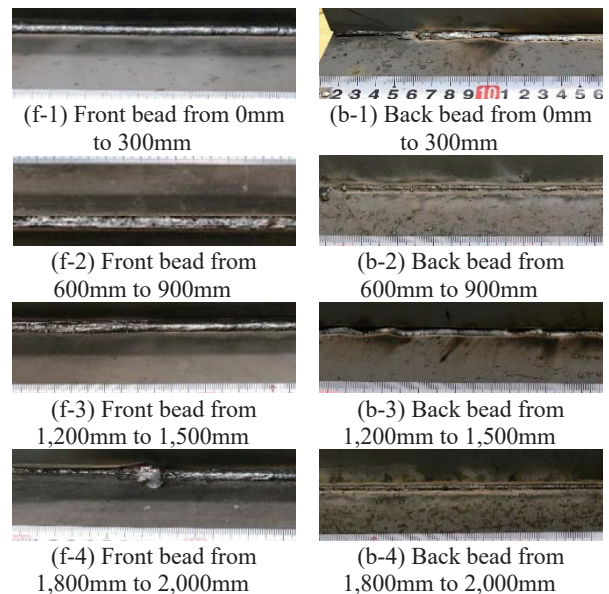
Weld bead appearance of full-penetration tee joint fabricated by one-side single pass welding. (Welding section from 0mm to 2,000mm, Initial gap 1.5mm, using seam tracking system).
